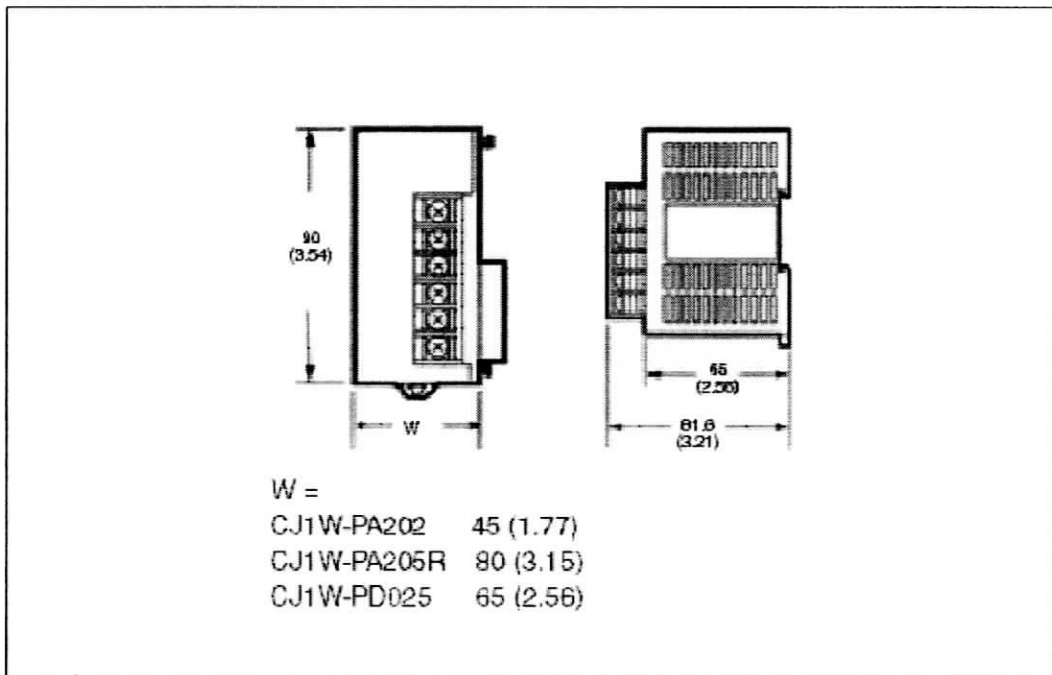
Dimension of CJ1 (Above and Bottom Position)
